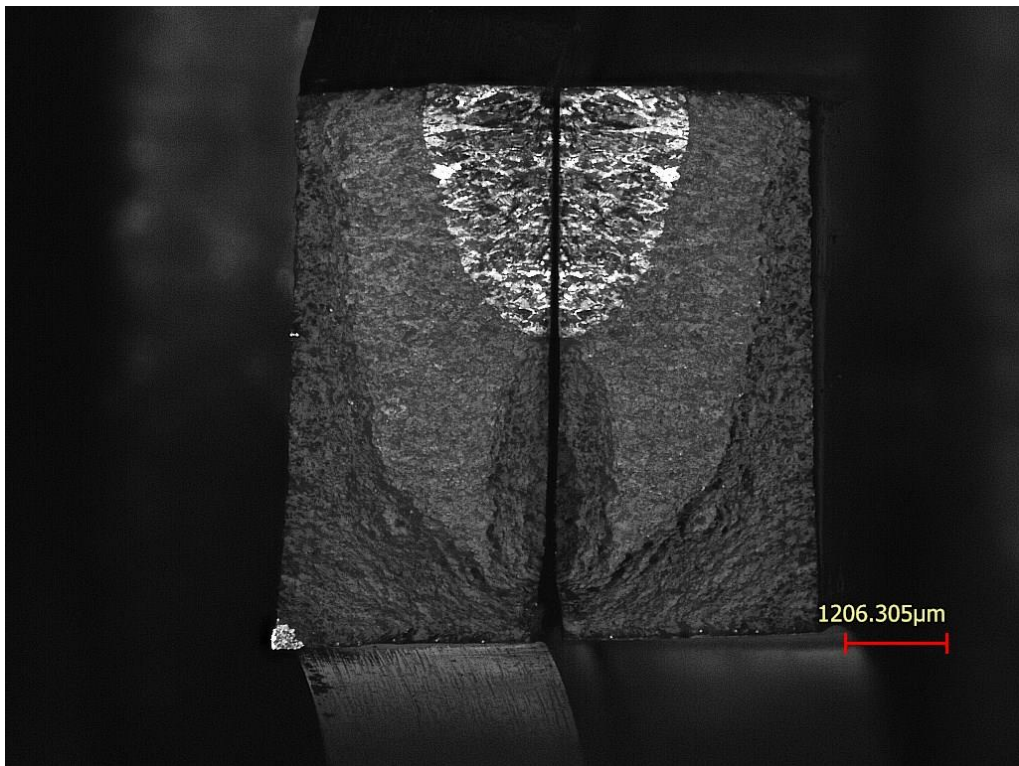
Specimen DS fracture surface (1,000,000 cycles : 67.54 ksi / 465.7 MPa)
